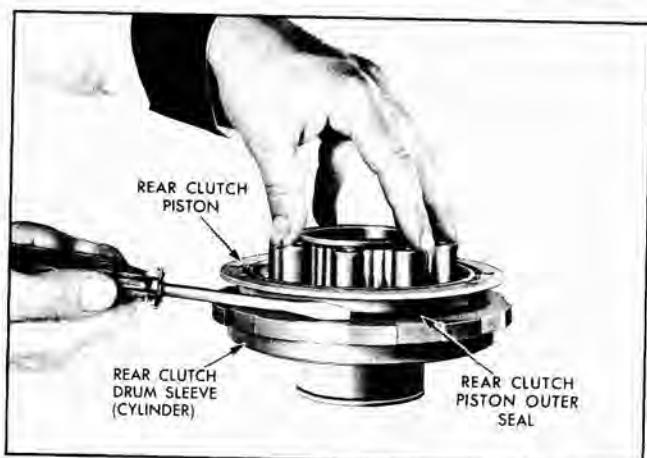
Installing Rear Clutch Piston into Rear Clutch Drum Sleeve (Cylinder)
